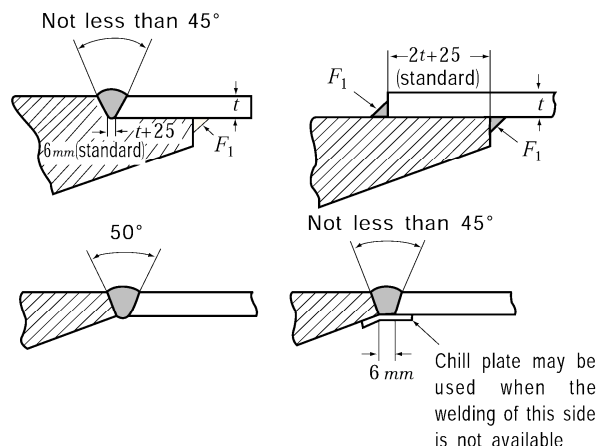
Connection with shell plating and cast steel stern frames
